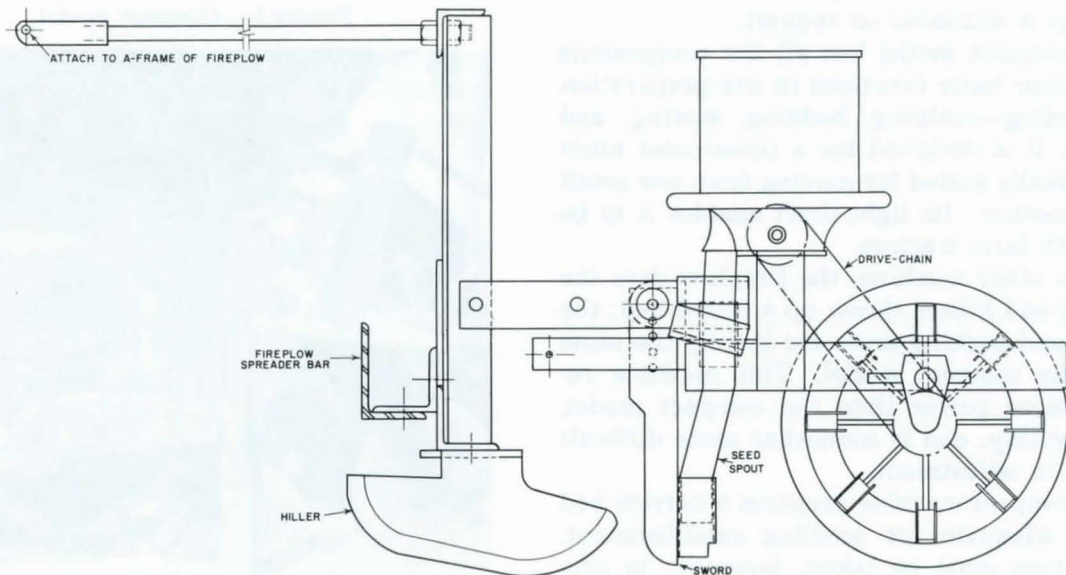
Construction details. Scale: 1 inch = 1 foot.
